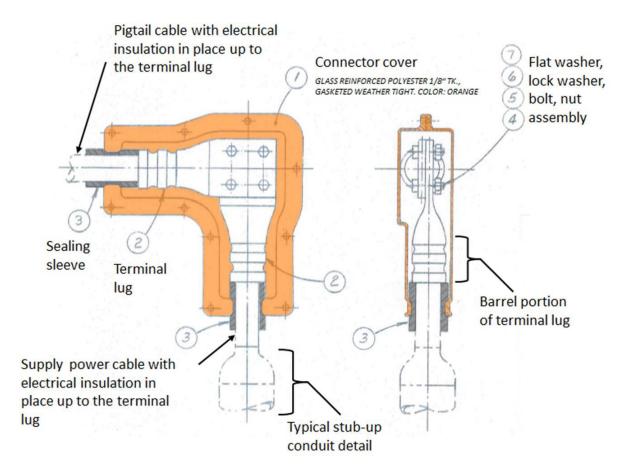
Cable connector assembly showing the correct arrangement of the terminal lugs, connector cover, and sealing sleeves. The typical arrangement of electrical power cables is identified.
